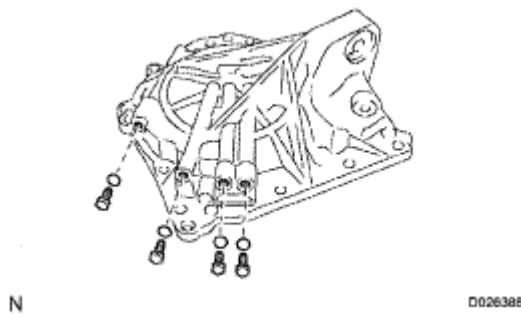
Identifying O-Ring And Transaxle Case No. 1 Plugs
